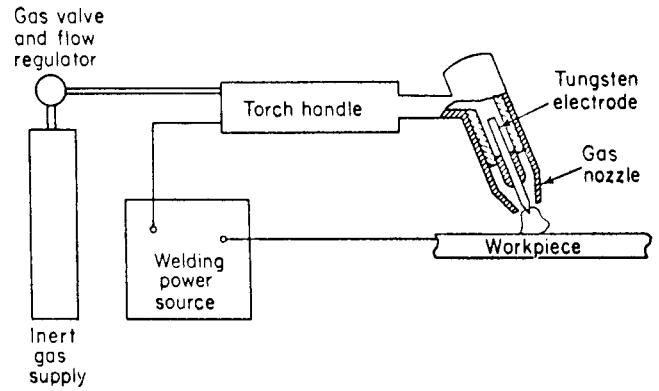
Tungsten Inert gas welding equipment (8) (GTAW).
